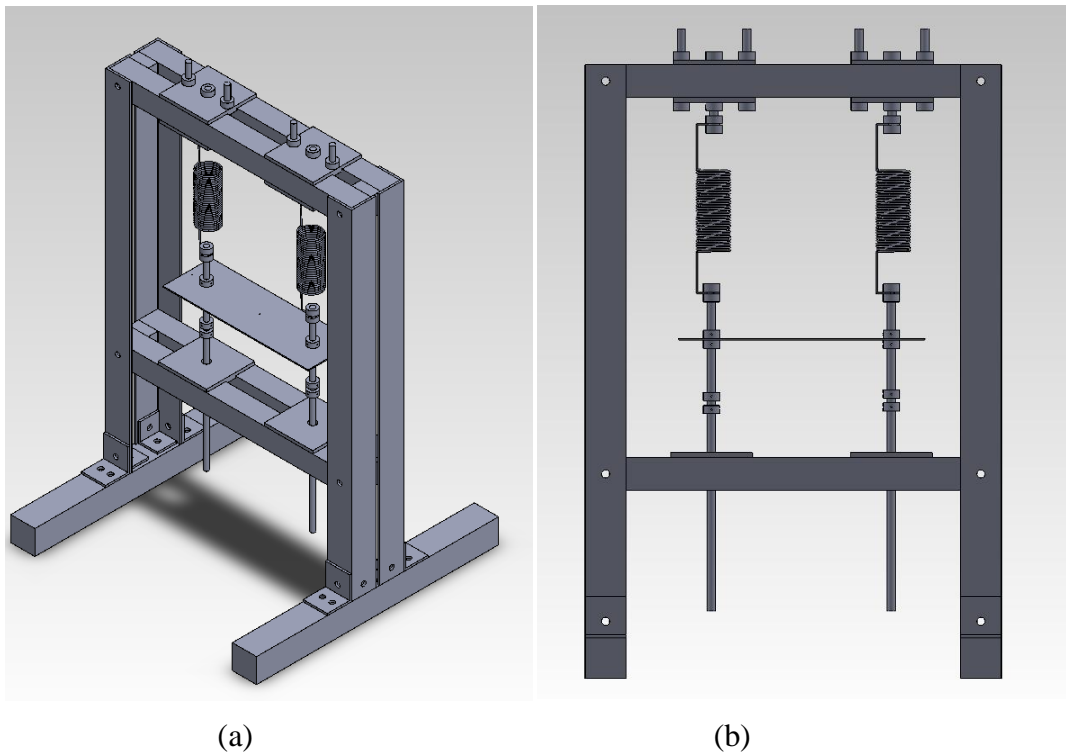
Design Concept 3 (a) isometric view, (b) front view
